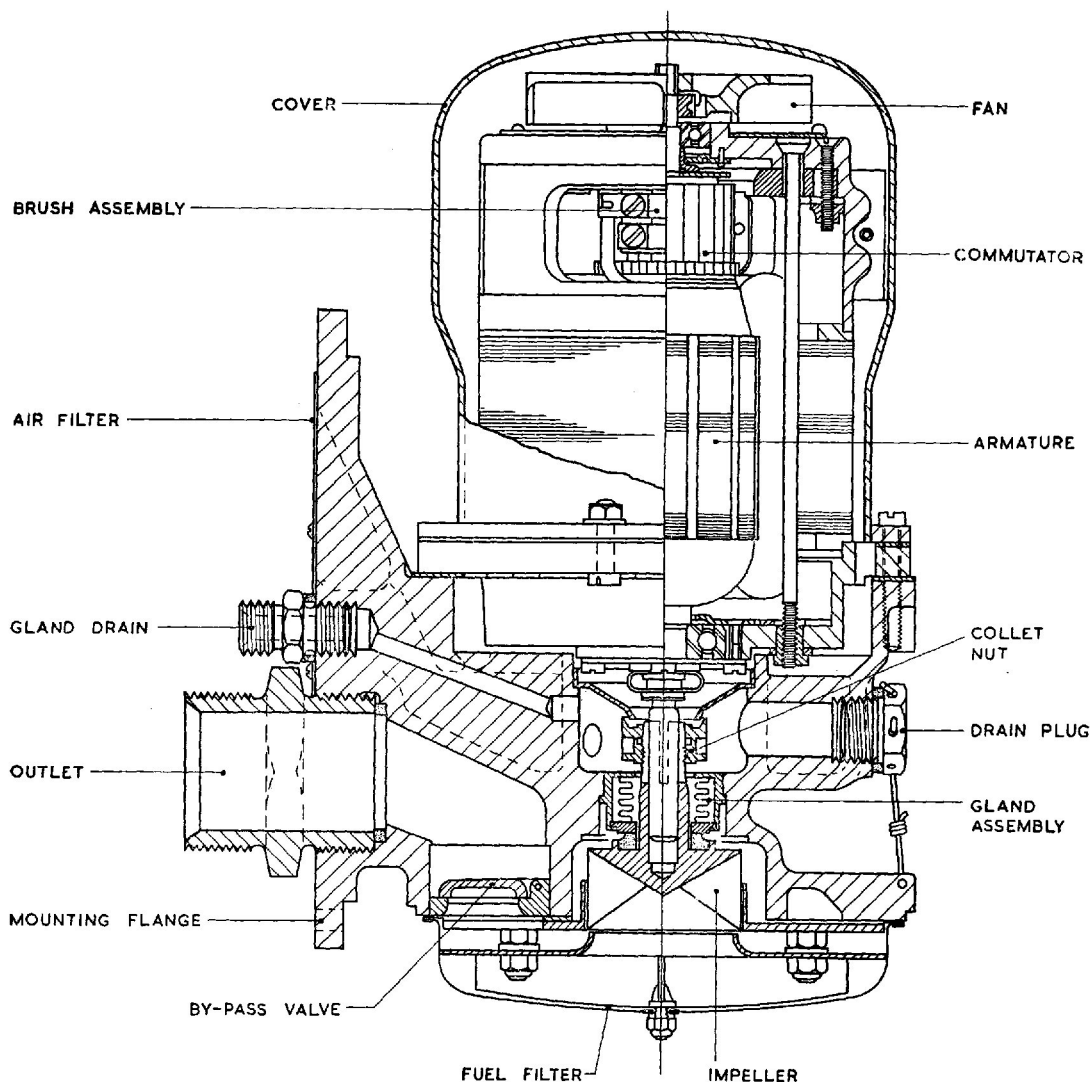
Sectional view of FB 160, Mk. 2 pump
